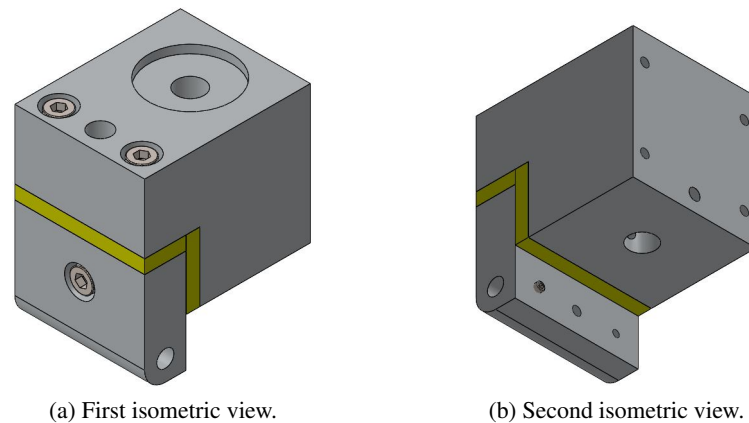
Isometric views of the new solution design for the assembly of the load and heat application tool.
